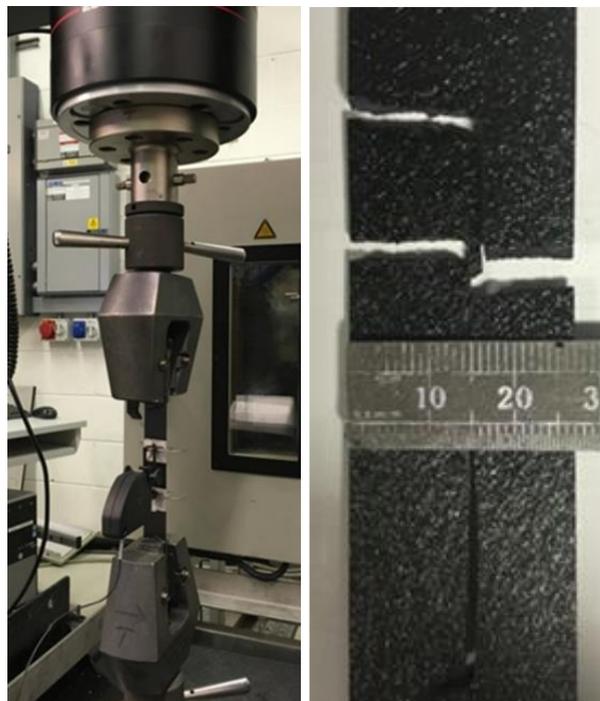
Tensile testing setup and typical fracture cross section of 3mm fibre laminate composite specimen
